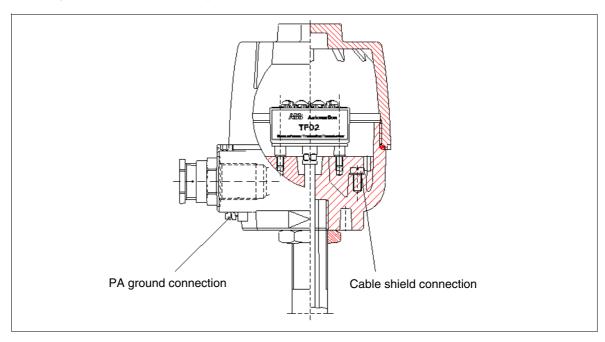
Mounting TF02 in the connection head type AGL or AGS
